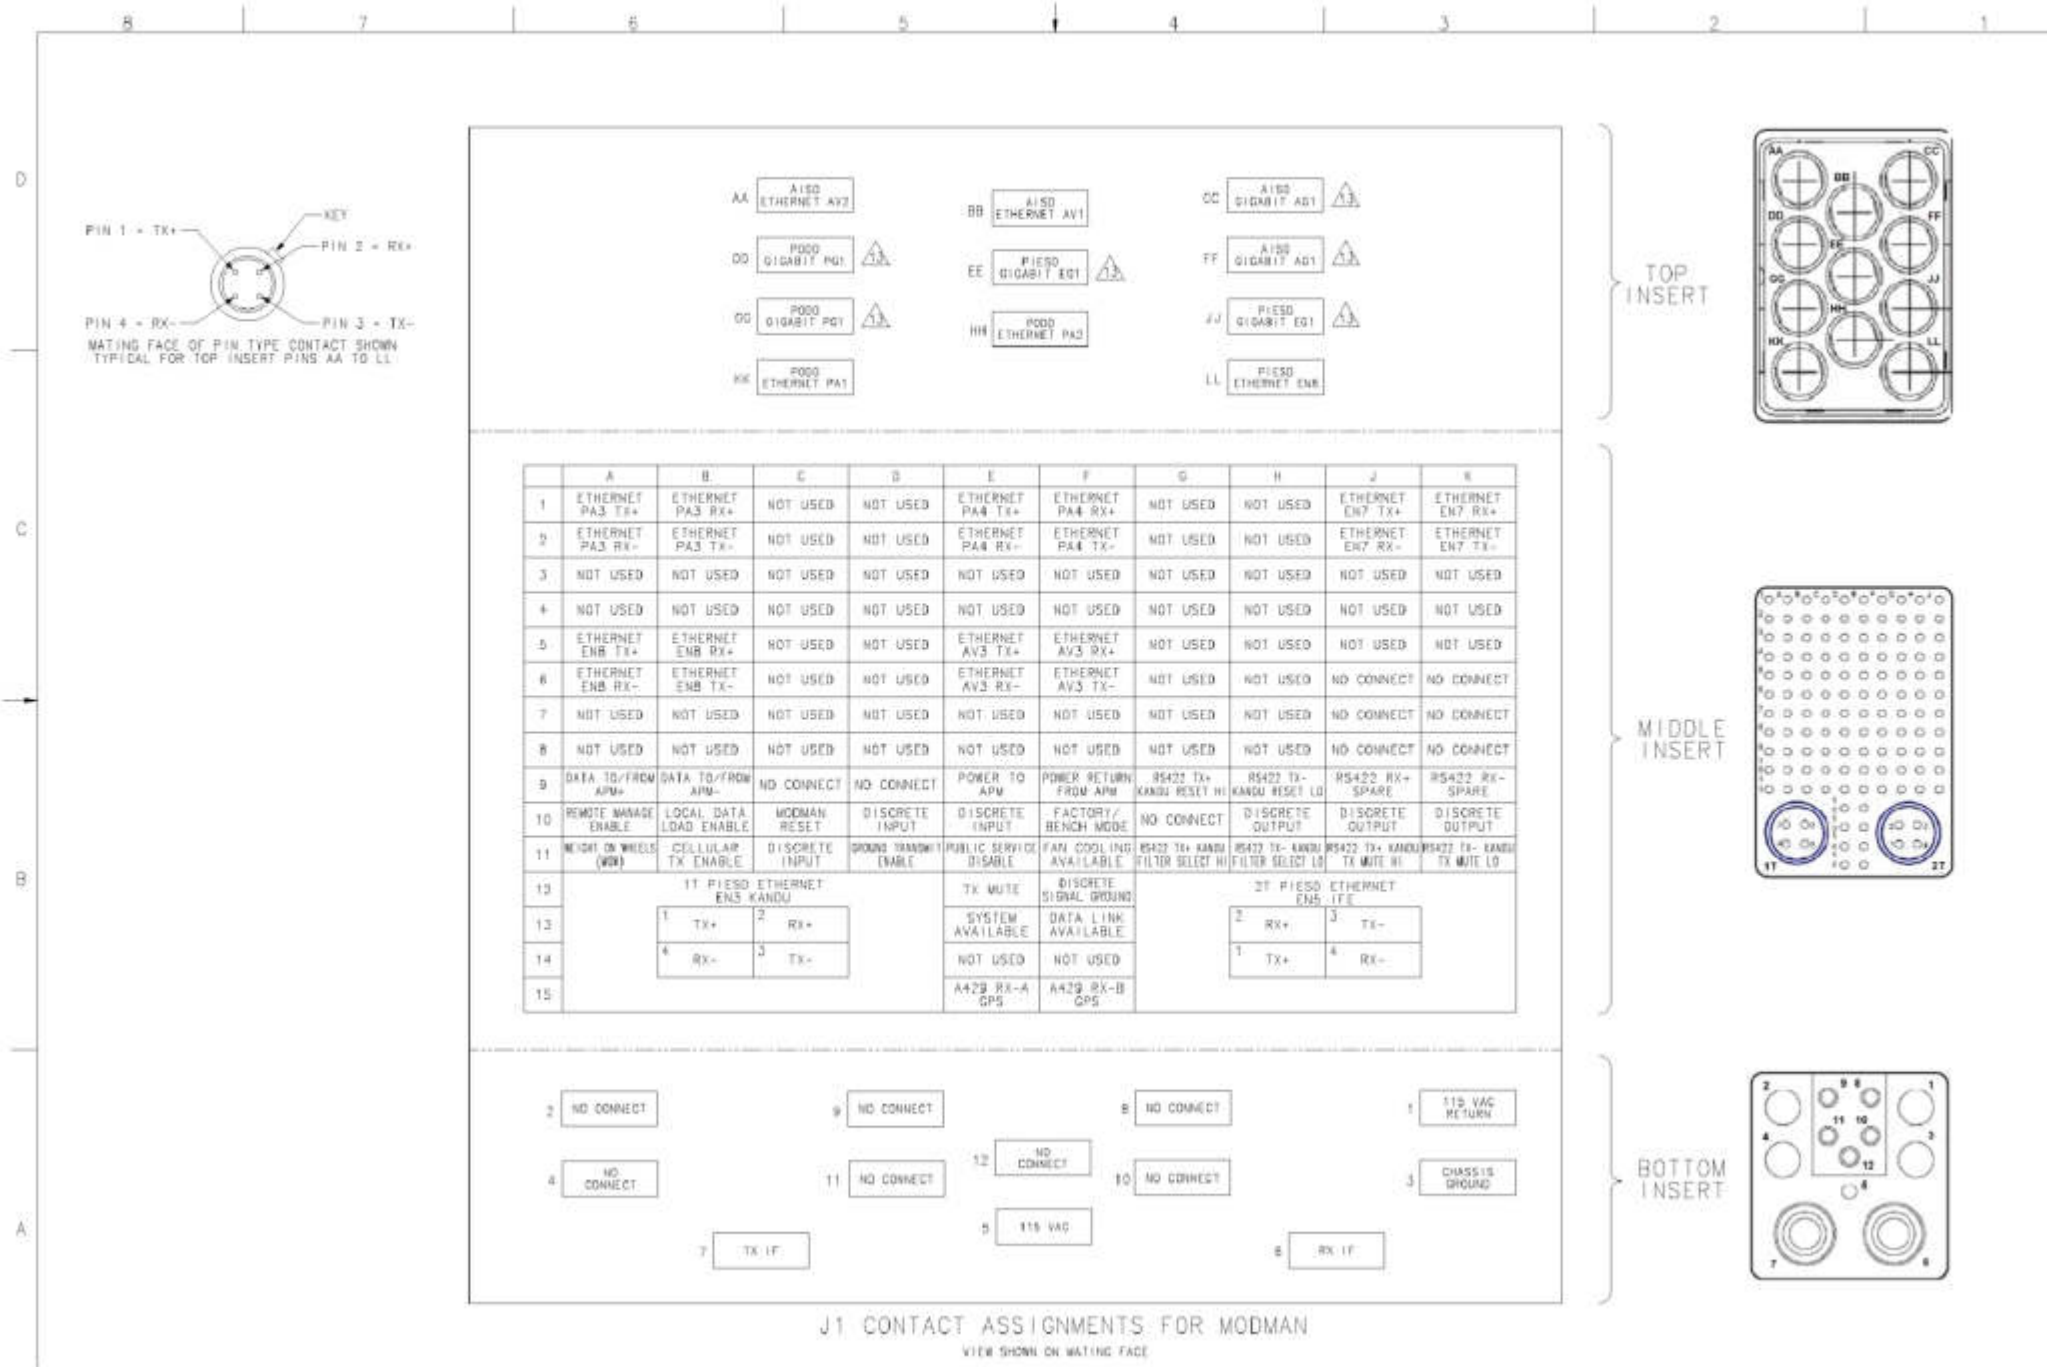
(Sheet 3 of 4) Modman Outline and Installation Drawing (90400012-0001)
